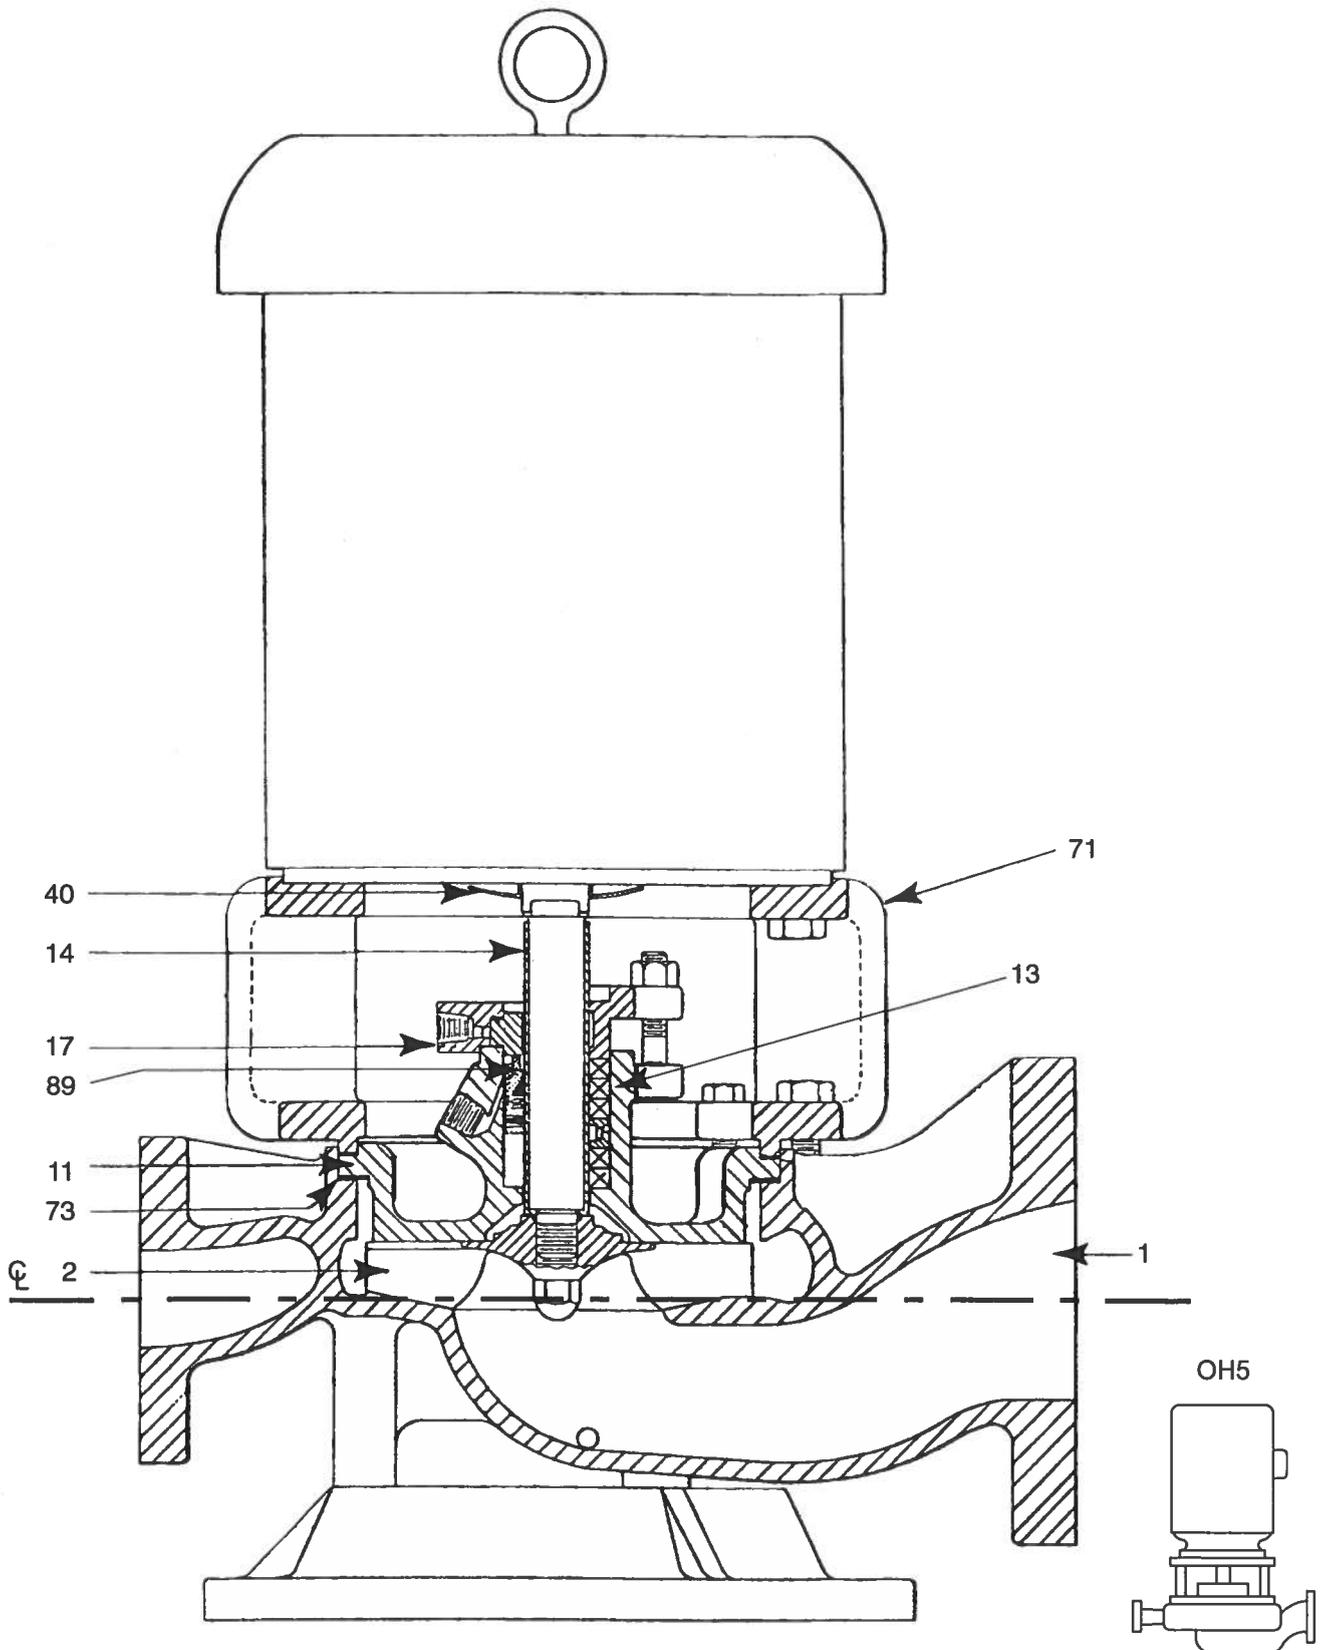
Overhung impeller – close coupled – single stage – in-line (showing seal and packing)
